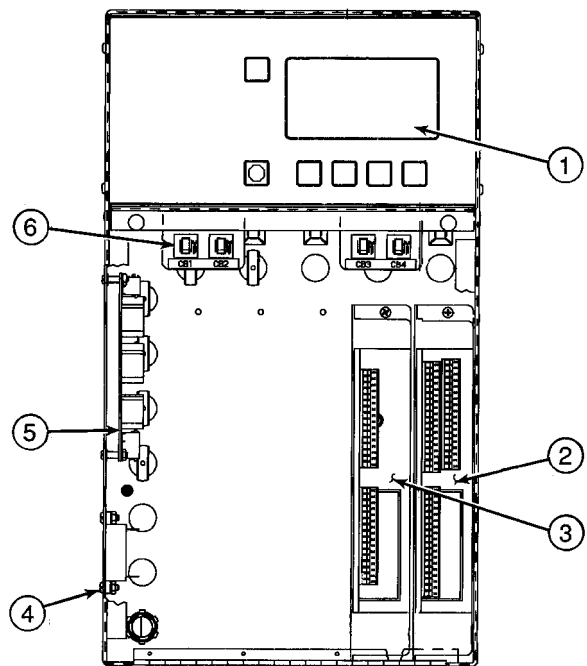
23XL Control and Sensor Locations (Frame 4 Machines)
